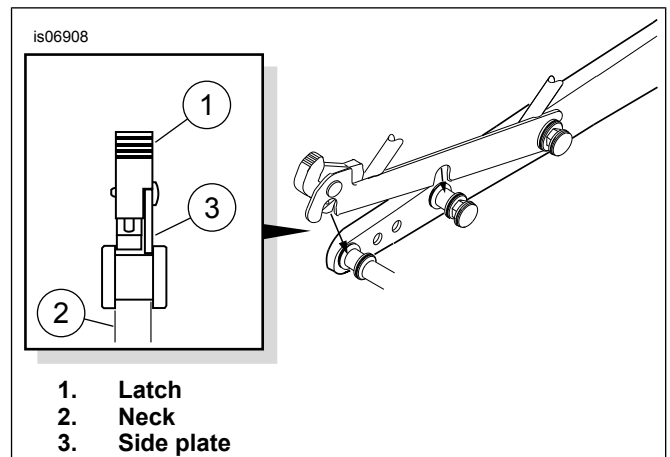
Pull back rotary latches and lower rack onto turn signal and rear docking points.
